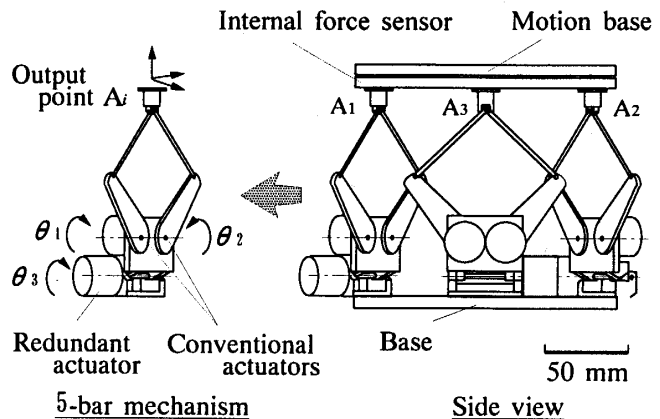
A proto-type 9 DOF redundant parallel manipulator
